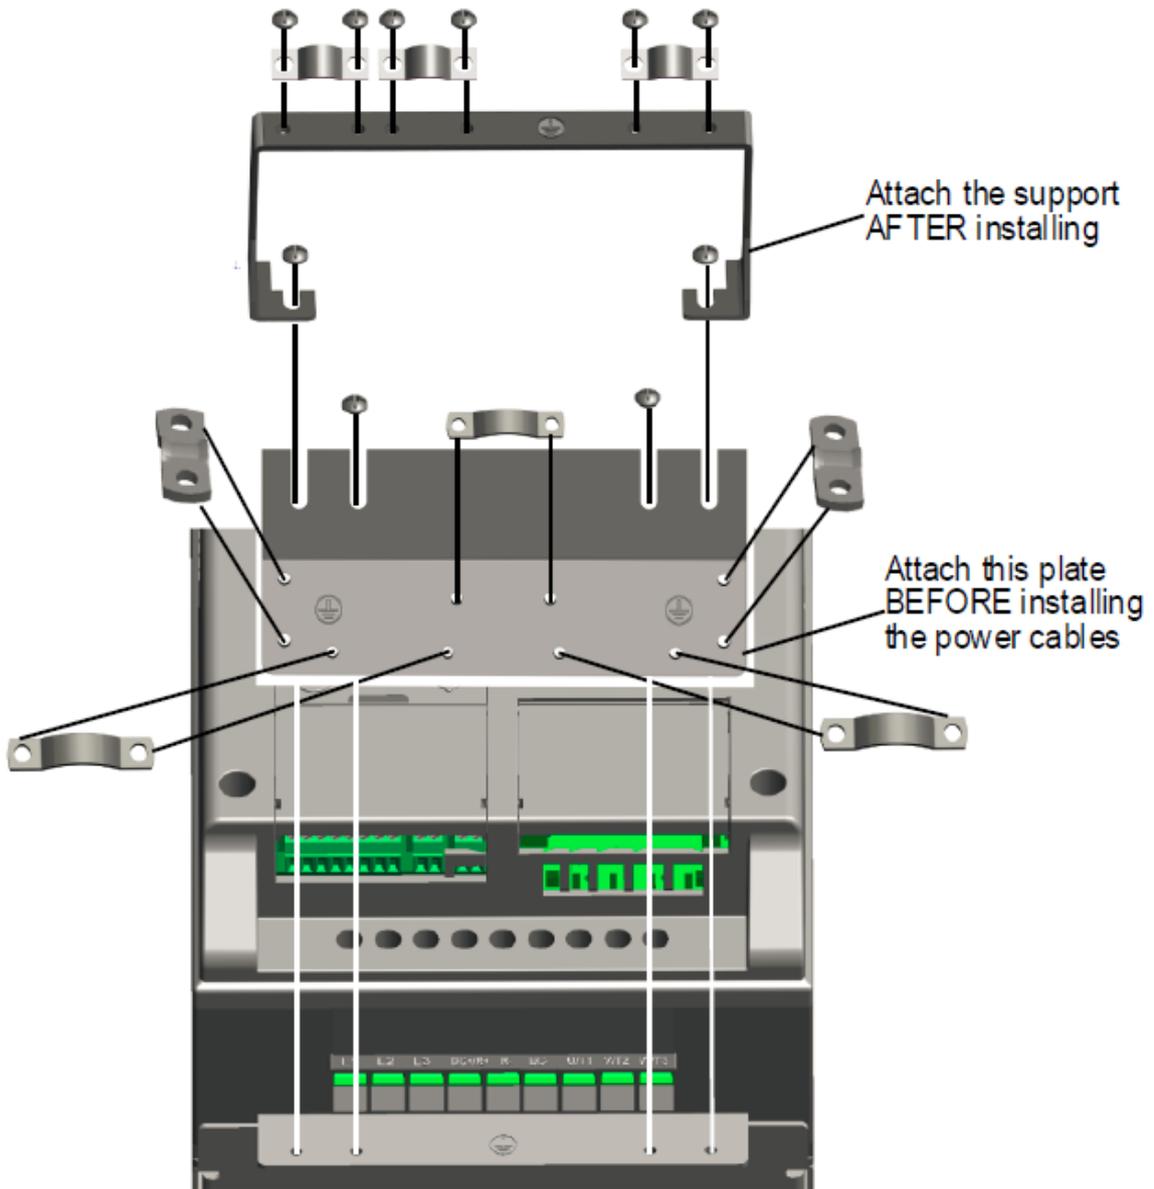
Mount the PE-plate and API cable support, MI4 - MI5
